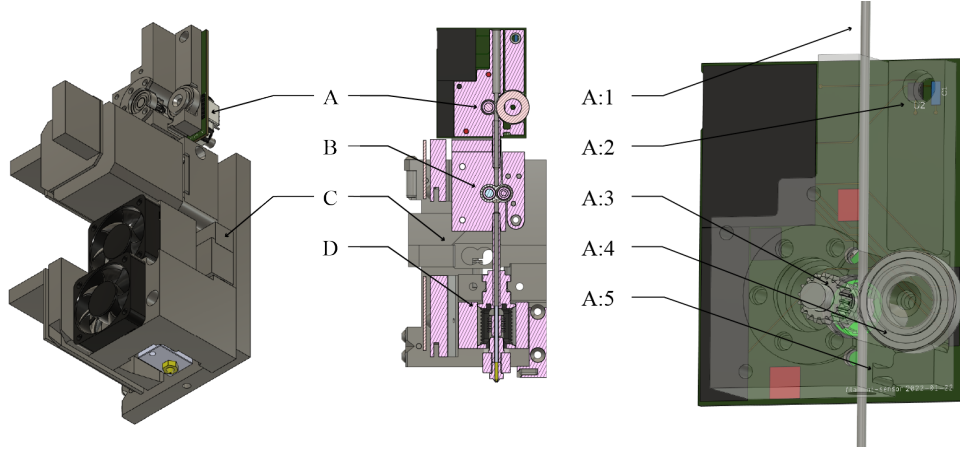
We designed and built an instrumented extruder for FFF 3D Printing. It is largely the same as most Commercial Off-the-Shelf (COTS) FFF extruders, using an E3D V6 hot end (D) and BondTech drive gears (B). To this assembly we add a loadcell (C) that sits in the middle of the structural loop between the drive gears and the hotend, meaning that it measures all of the force exerted by the drive gears onto the filament. We use this reading as a pressure analog. Additionally, we developed a filament sensor (A) that measures the real linear feed rate of the filament (A:1) using an idler gear attached to an encoder (A:3) preloaded by an idler roller (A:4). The roller is pre-loaded using a flexural hinge (A:5) and a lever arm. A hall-effect sensor (A:2) reads the displacement of this lever arm; these readings are calibrated and used to measure real filament diameter. More detailed figures and CAD models of these components are included in the repository referenced at the beginning of this section.
